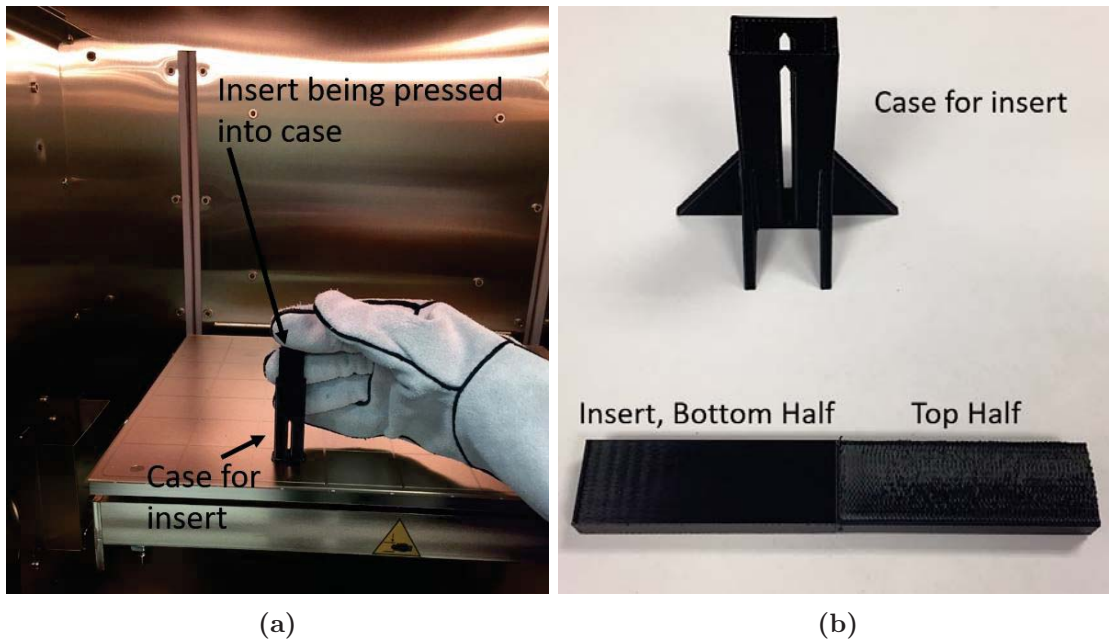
(a) Inserting the pre-printed part into the case inside the Fortus 450mc during the pre-programmed pause. (b) Completed tensile specimen removed from case part. Note the right side of the specimen is newly printed in the ZX direction and the left side is the pre-manufactured insert part printed in the YX direction.
